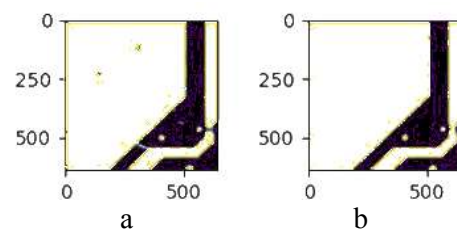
Two fragments of PCB images: with defects (a), and without defects (b)
